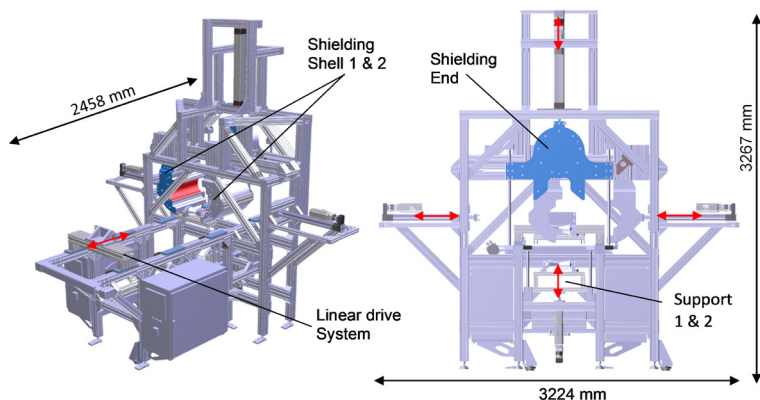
Isometric and back CAD view of HBS target handling tool design
